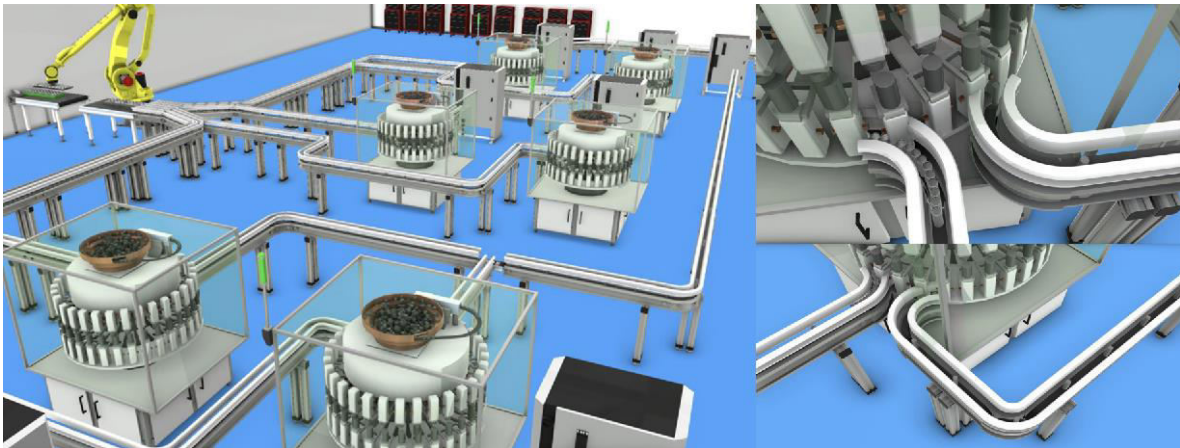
Electrolyte filling, cell sealing and tab welding machine.
